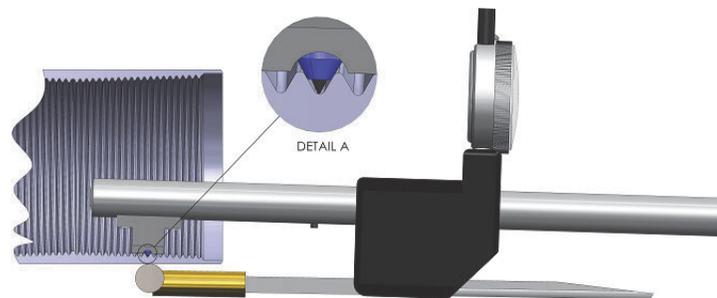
Internal Thread Height Gauge on Coupling Threads (Round Thread Height Gauge)
